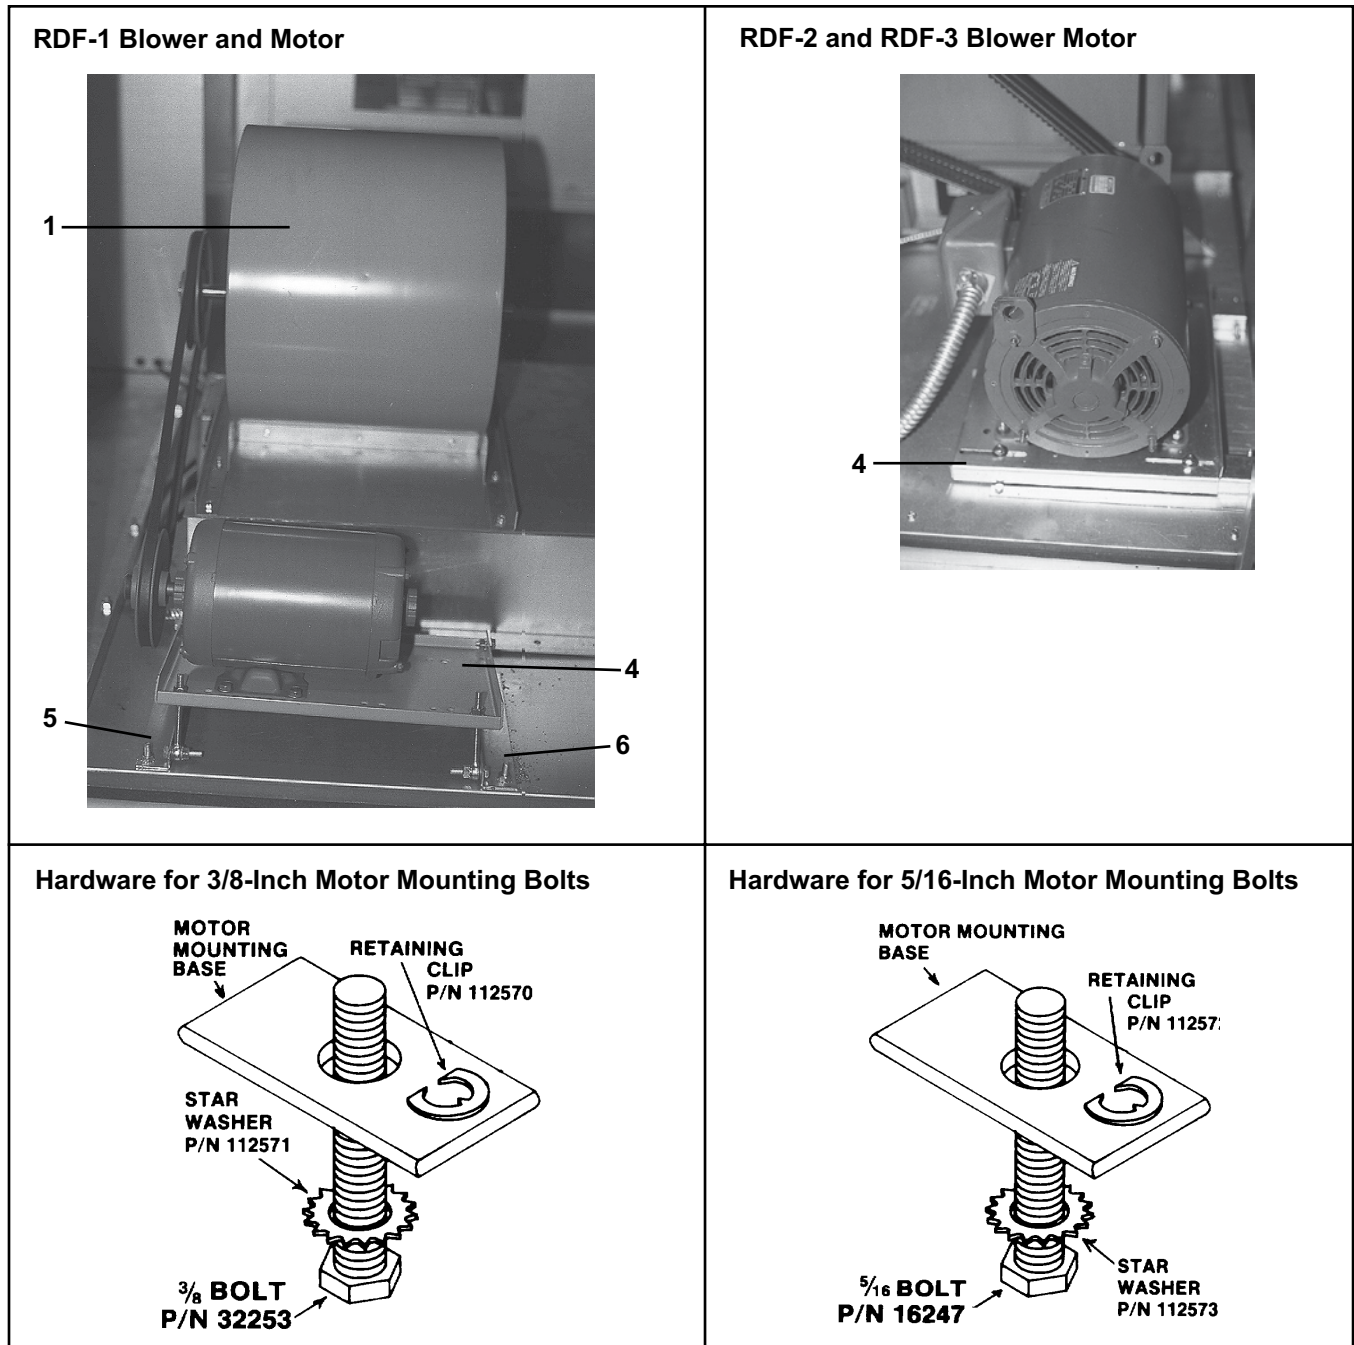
Blower- and Motor-Mounting Components (Refer to [Table 25](#))
